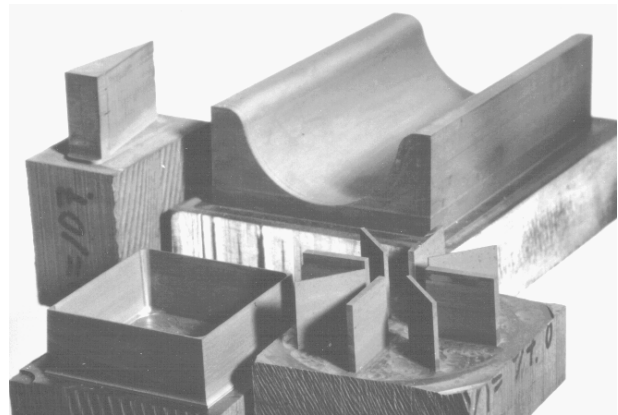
Sample parts in the high-speed milling tests of graphite.
